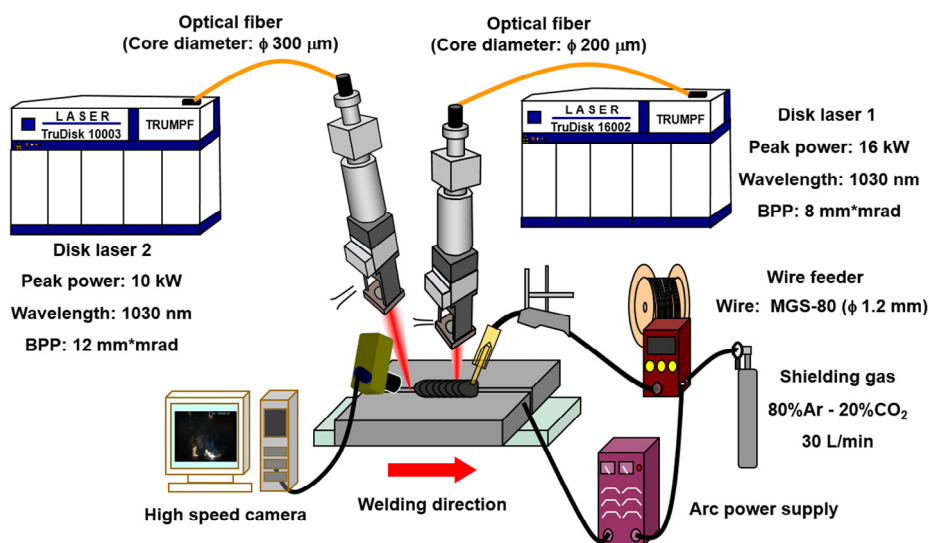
Schematic experimental setup of laser-MAG arc hybrid welding using two disk lasers.
